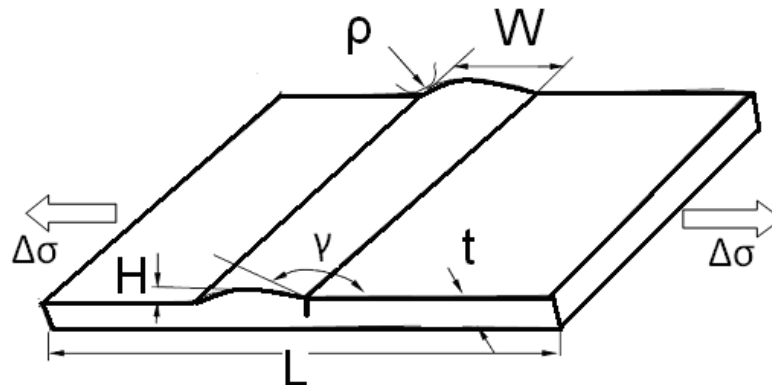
Weld geometrical parameters of butt welds (Al-Mukhart A., 2010)
